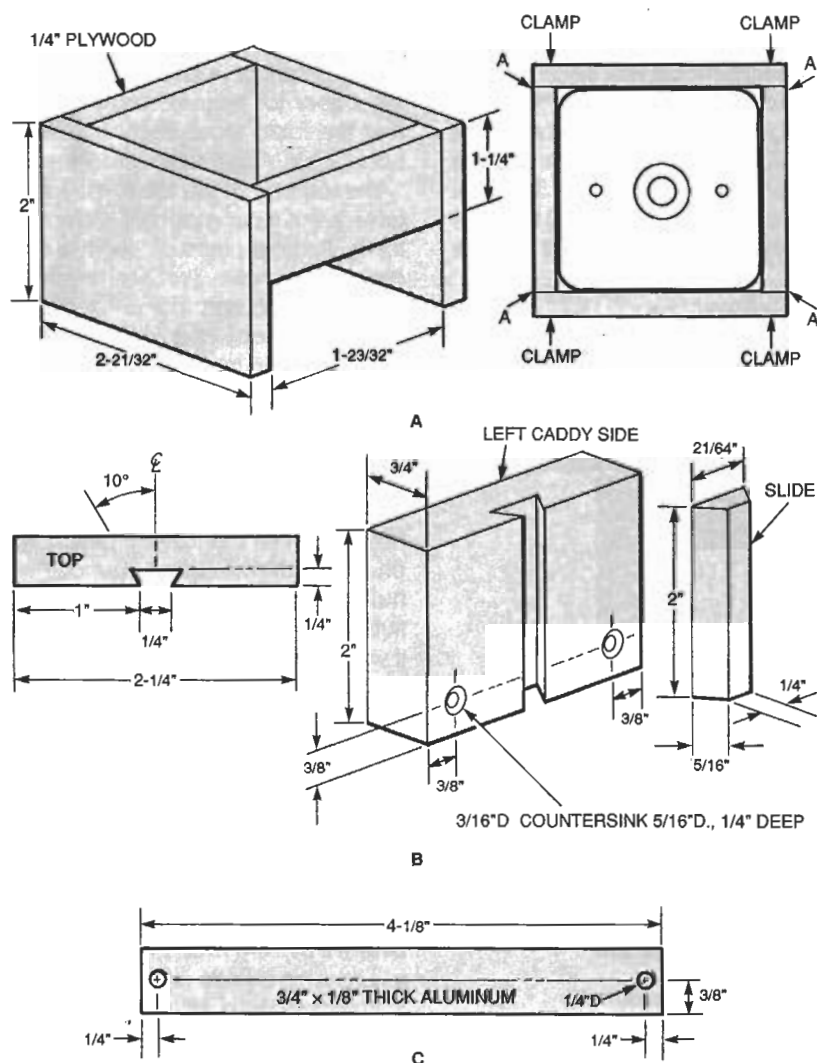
The drill holder (A), the caddy sides and slide (B), and the side stretcher (C) are the drill-holder components shown here.
